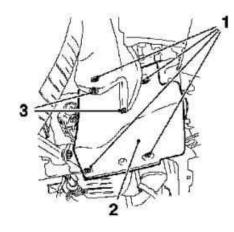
Components, Removable cover for dismantling the cylinder head: 1 - right engine splash guard, 2 - mounting screws, 3 - rivets
